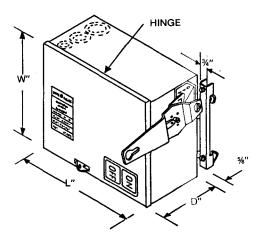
Door hinges at top. For overall dimension, add $1\frac{1}{2}$ inches to "L" dimension.
